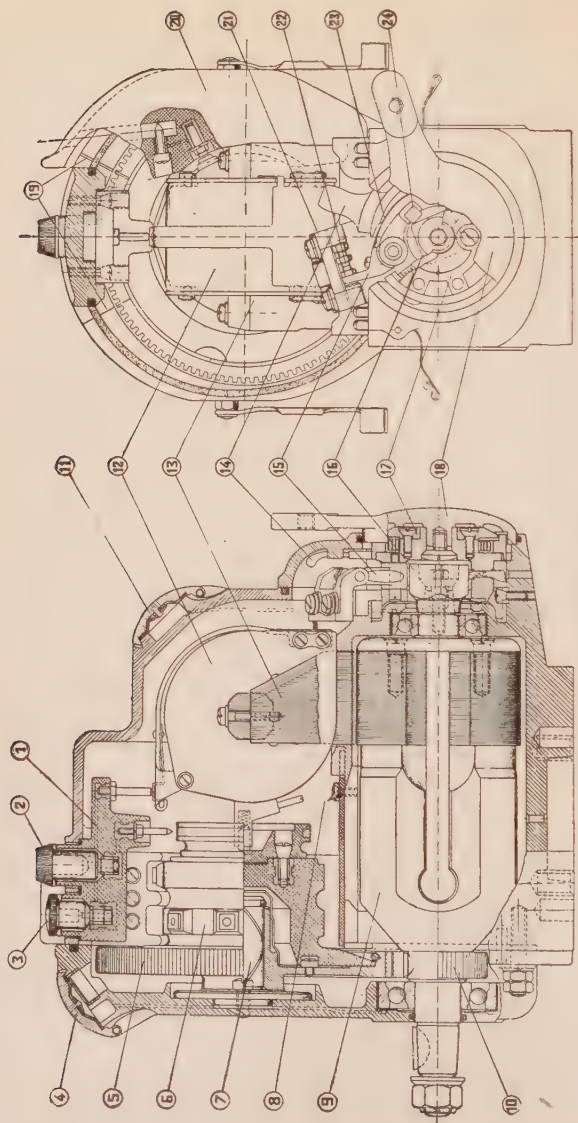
Sectional Drawing of Scintilla Aircraft Magneto.
